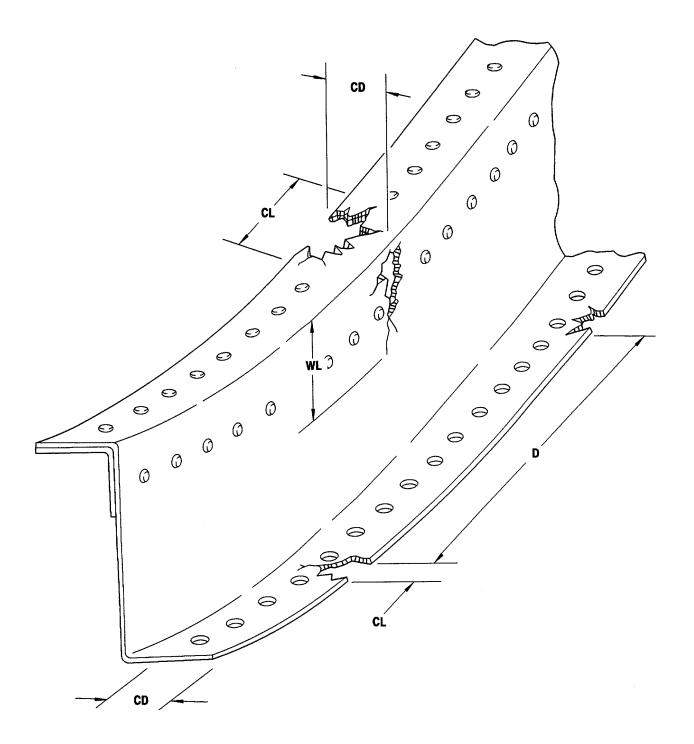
Evaluating Damage to Built-Up Sheet Metal Beams (Sheet 1 of 2)
